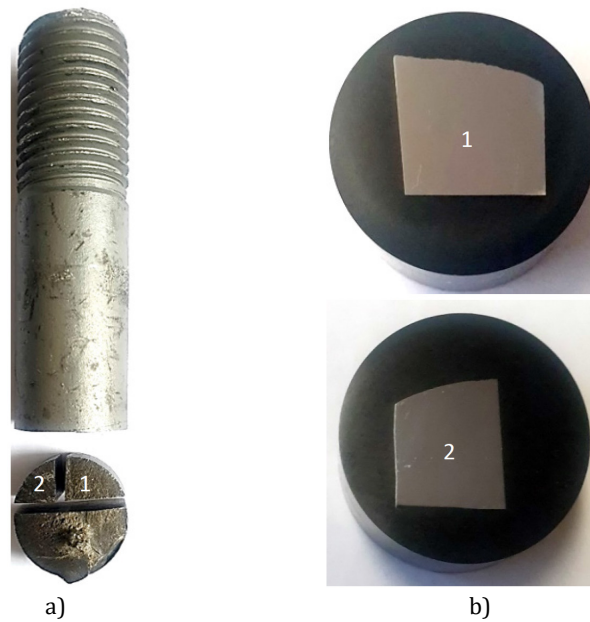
Sampling for microscopic analysis: (a) cutting a part of the bolt shank with a fracture surface; (b) mounted metallographic samples 1 and 2
